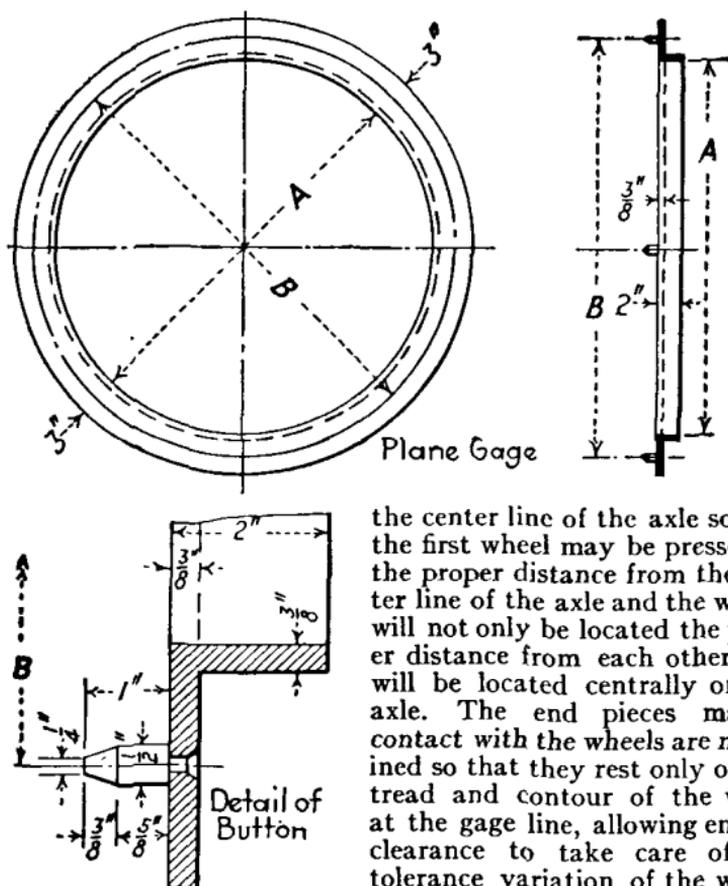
A.E.R.E.A. standard plane gage. Measurements A and B vary depending on diameter of wheel to be gaged.
